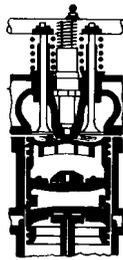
Open combustion chamber with swirl produced by intake ports.
